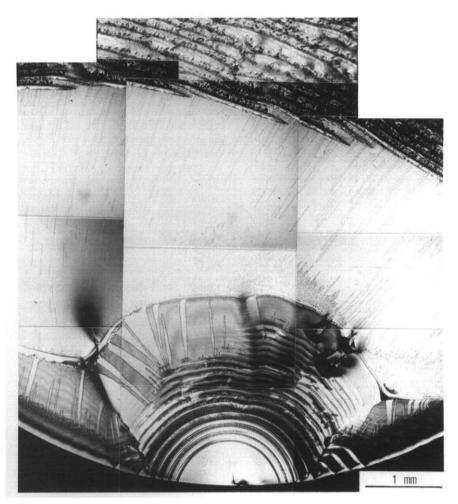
Fracture surface of the fatigue specimen without presoaking treatment. $N_f = 590$
